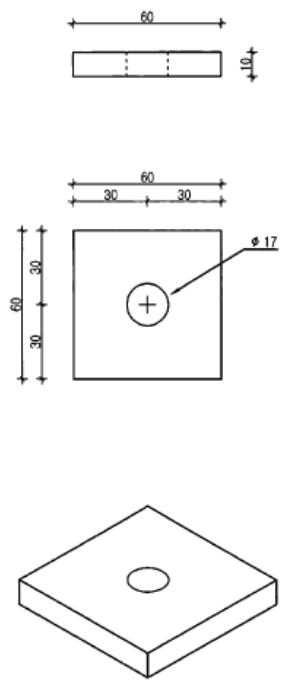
Dimensions of the foot plate for hold-downs 60x60x10
